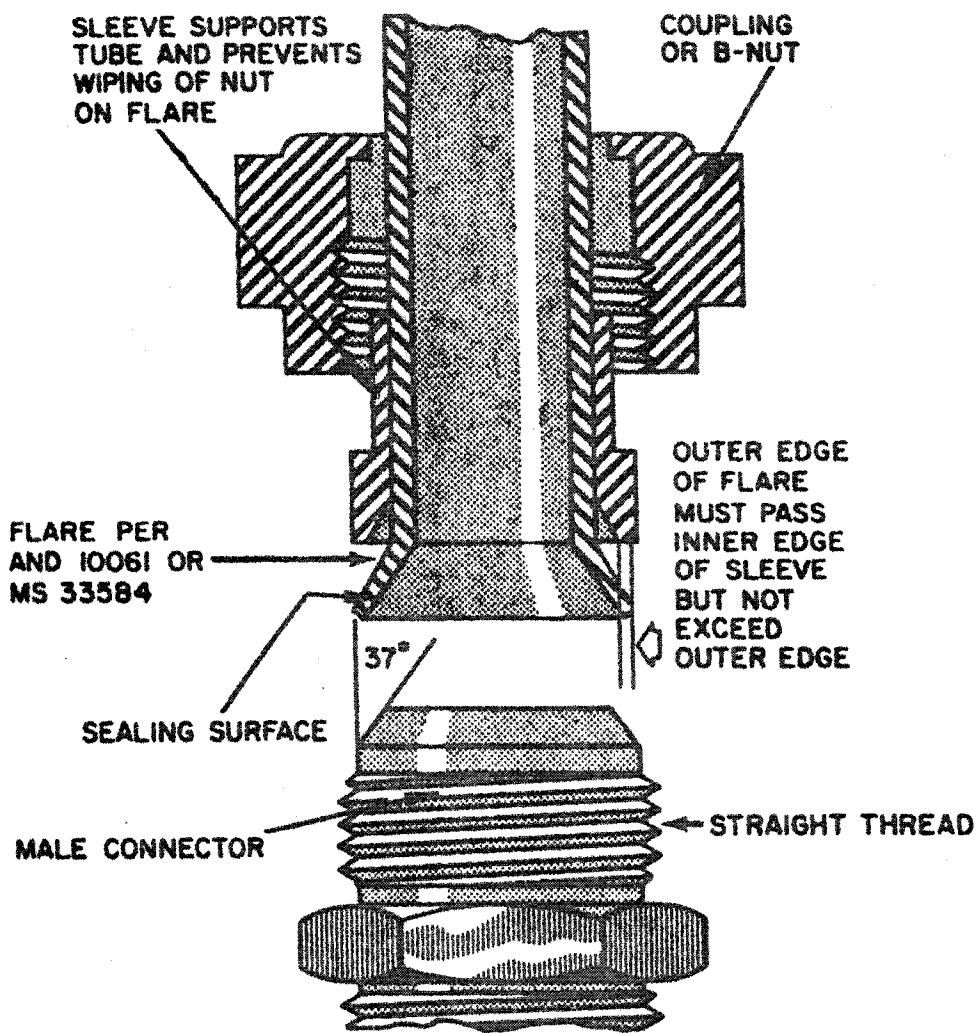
3 Piece AN Flared Tube Fitting Per MS33656
